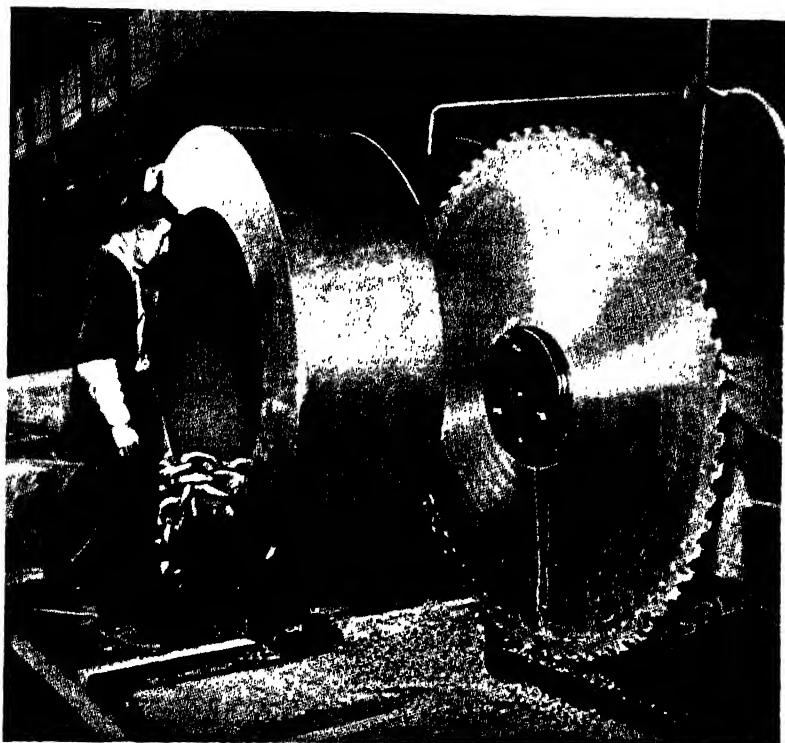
Example Illustrating Unusual Application of Heavy-duty Metal Sawing Machine
